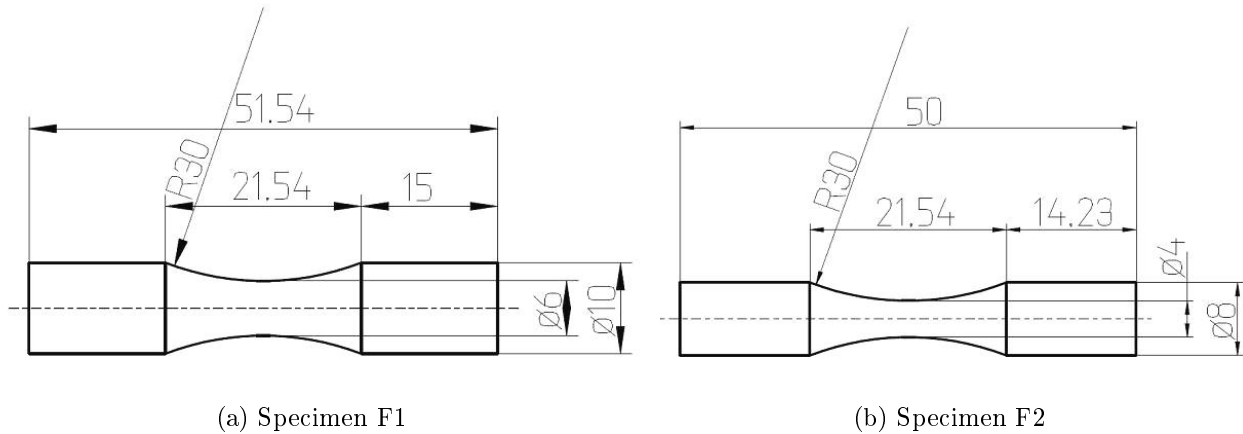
Technical drawings of the fatigue specimens used in the study.
